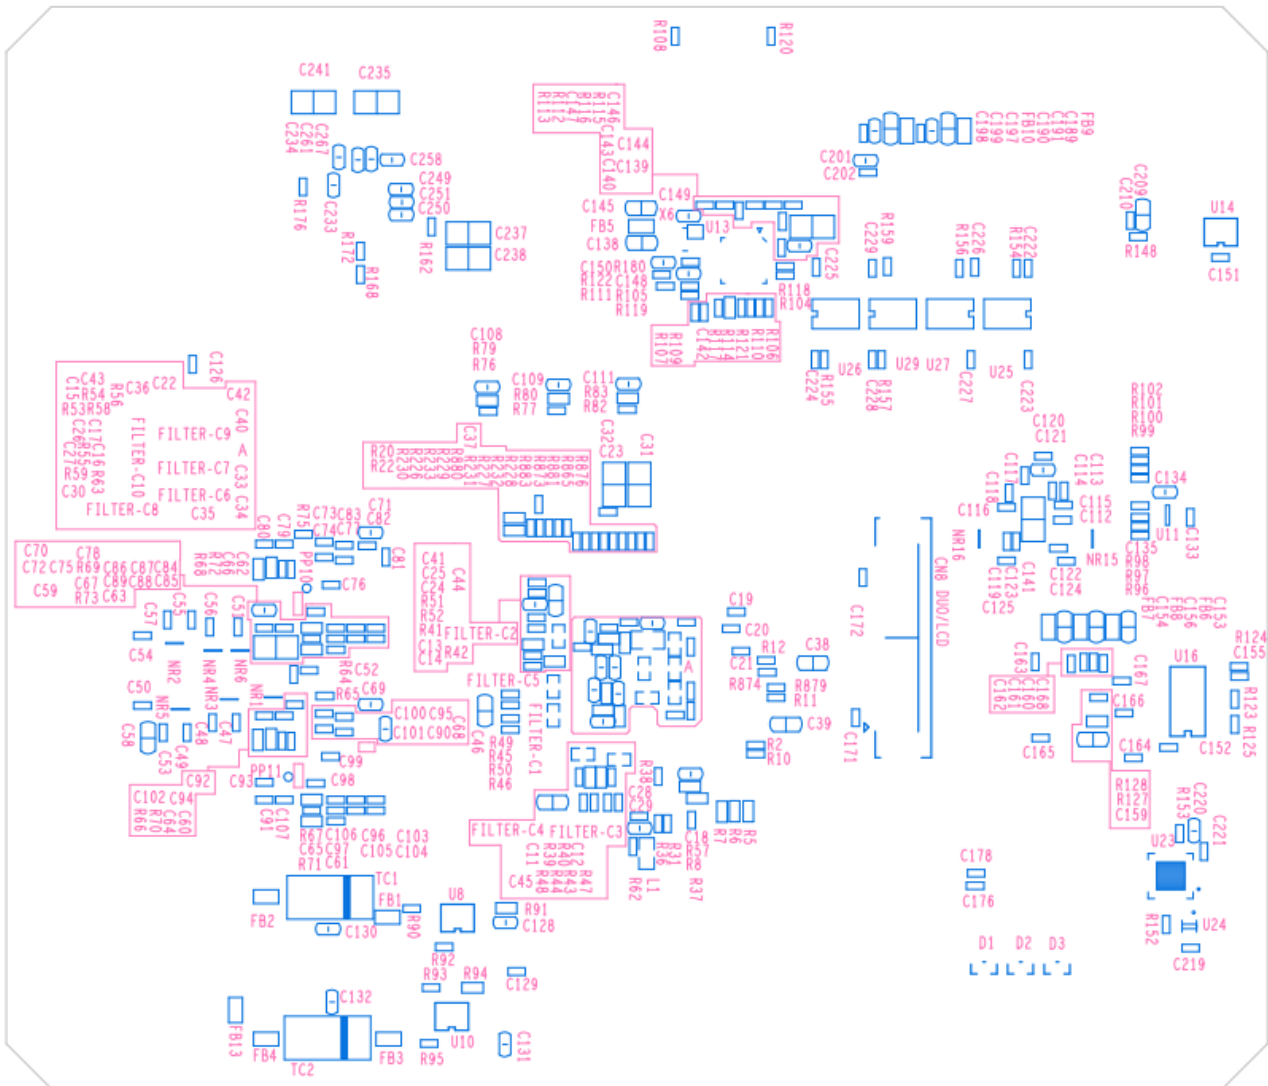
Connector Locations of the YR8A77450S000BE Board (Solder Surface) (Top View)
